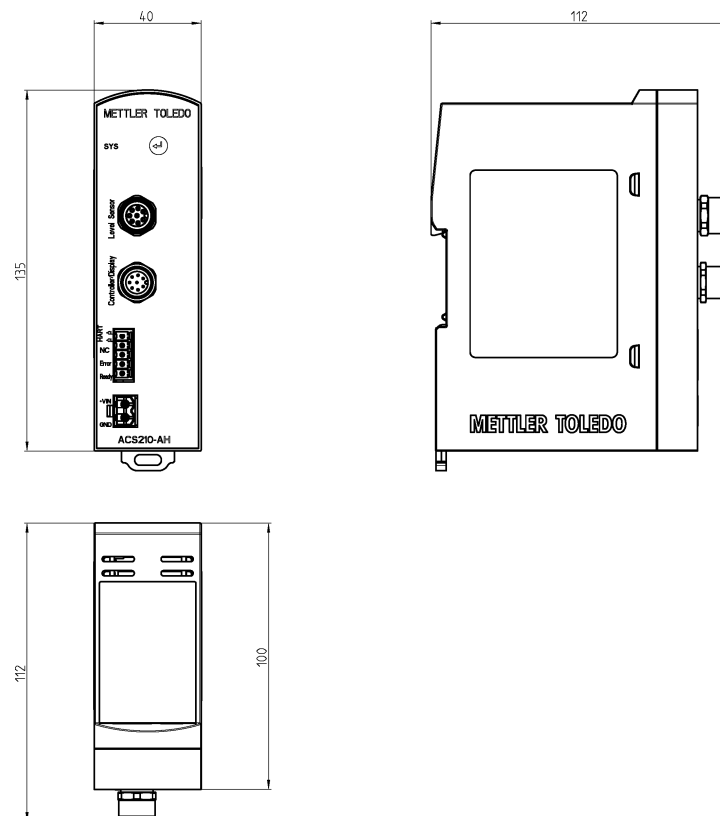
ACS210 AnyLevel™ unit technical drawing.
